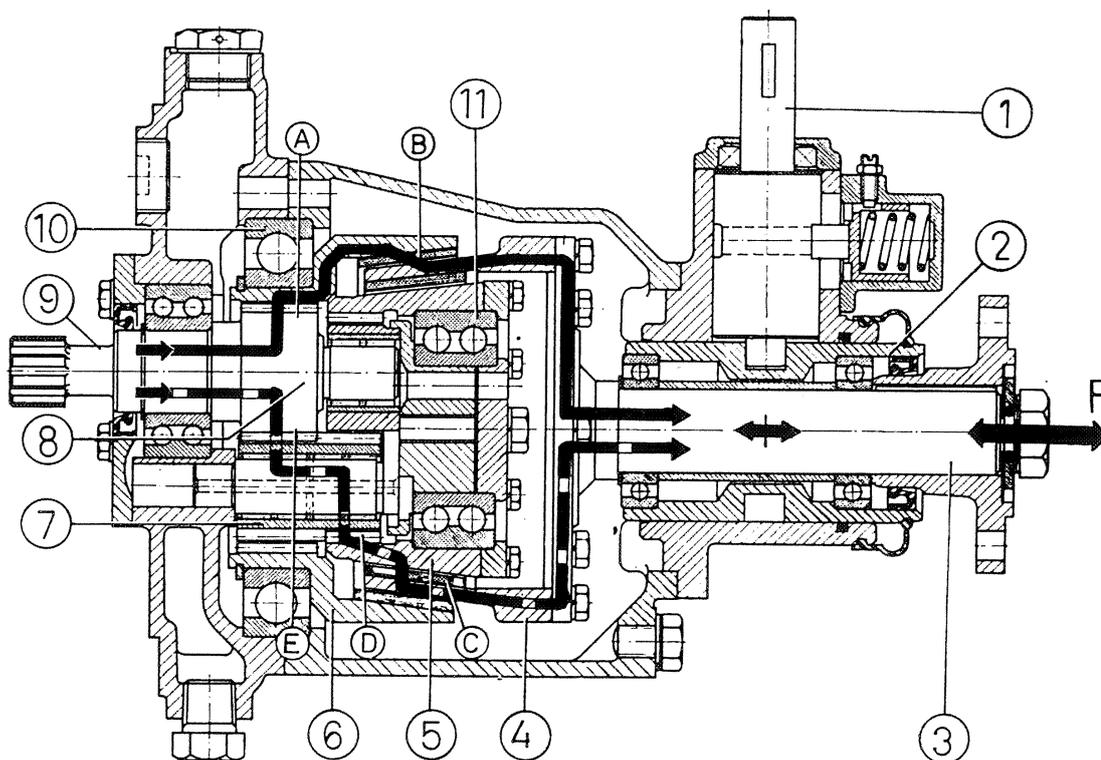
Reverse and reduction gear RB (ratio 1.91:1)
